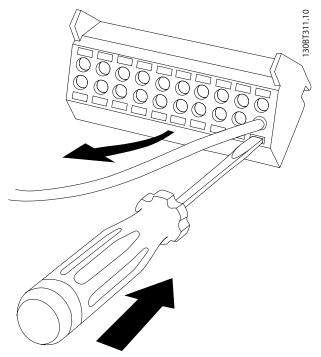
Removing the Screwdriver after Cable Insertion
